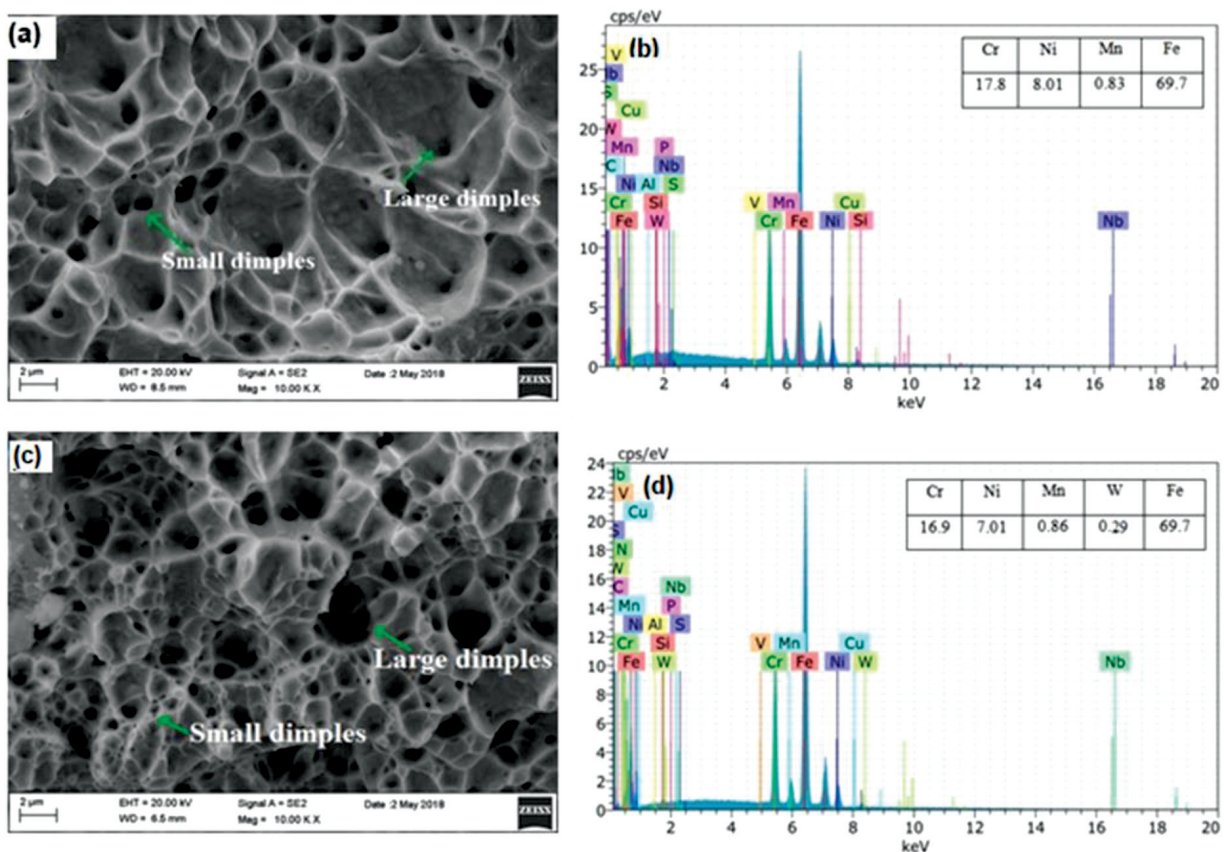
Fractographs and EDS of the tensile tests: a), b) base metal, c), d) weld metal
